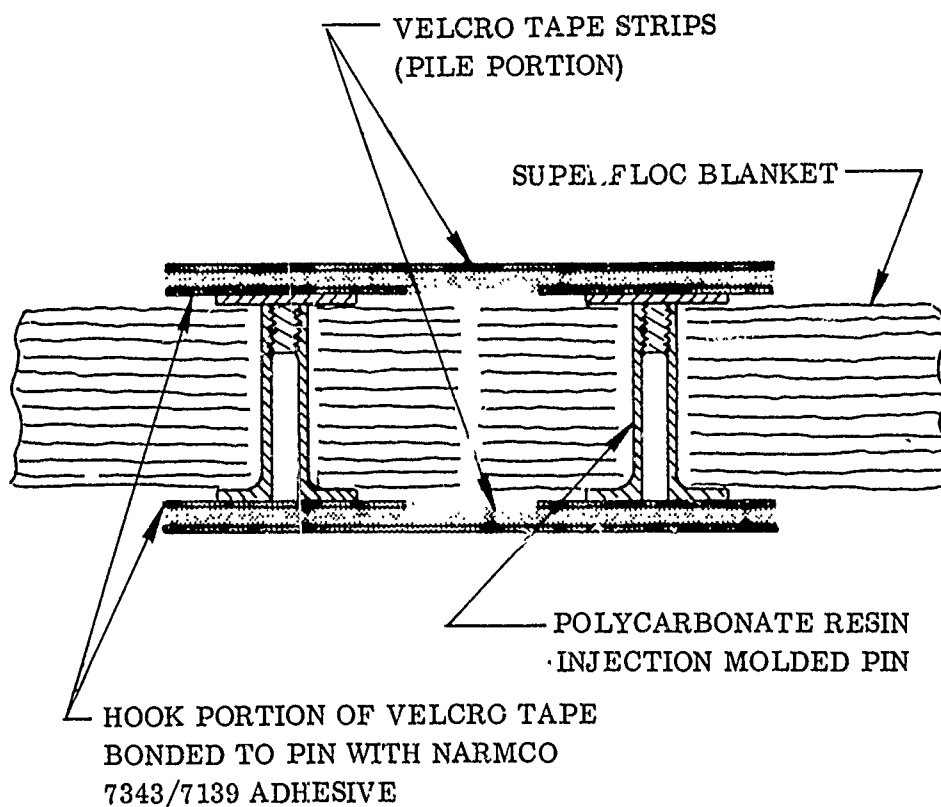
Single Pin Blanket Attachment with Velcro Tape
